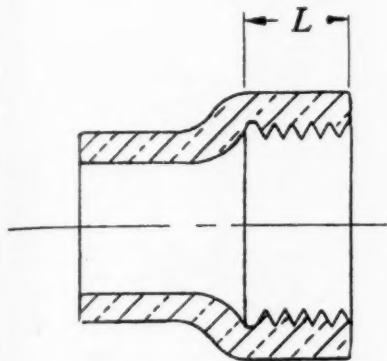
Coupling Nut for Use With Flared Copper Service Tubes, Type K
